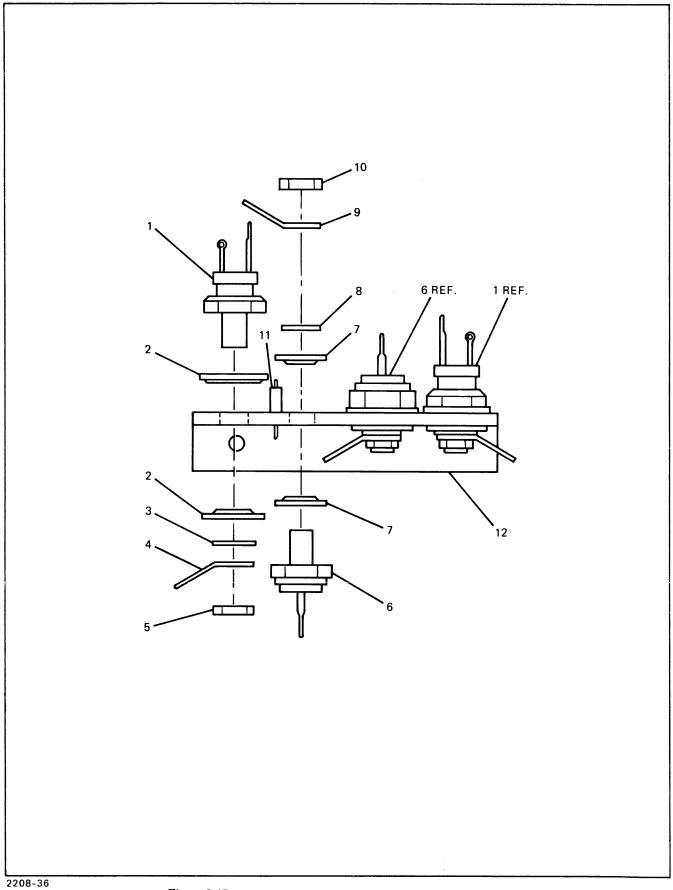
Output Crowbar Assembly (A13), Exploded View
